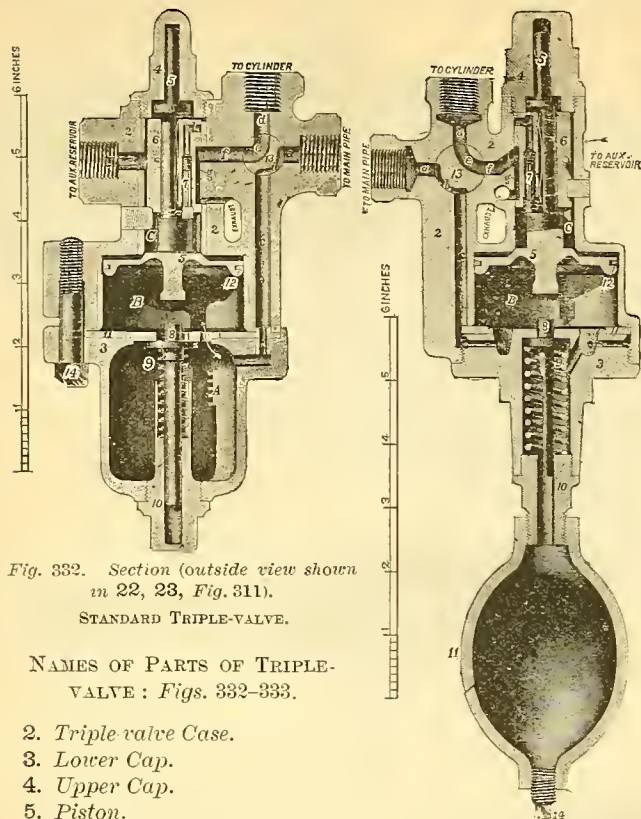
Section (outside view shown in 22, 23, Fig. 311).
